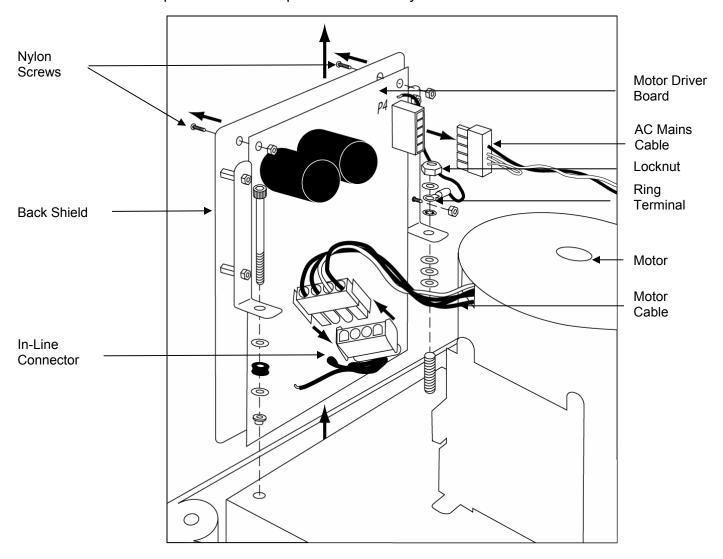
Motor Driver Electronic Assembly Exploded-View Diagram
